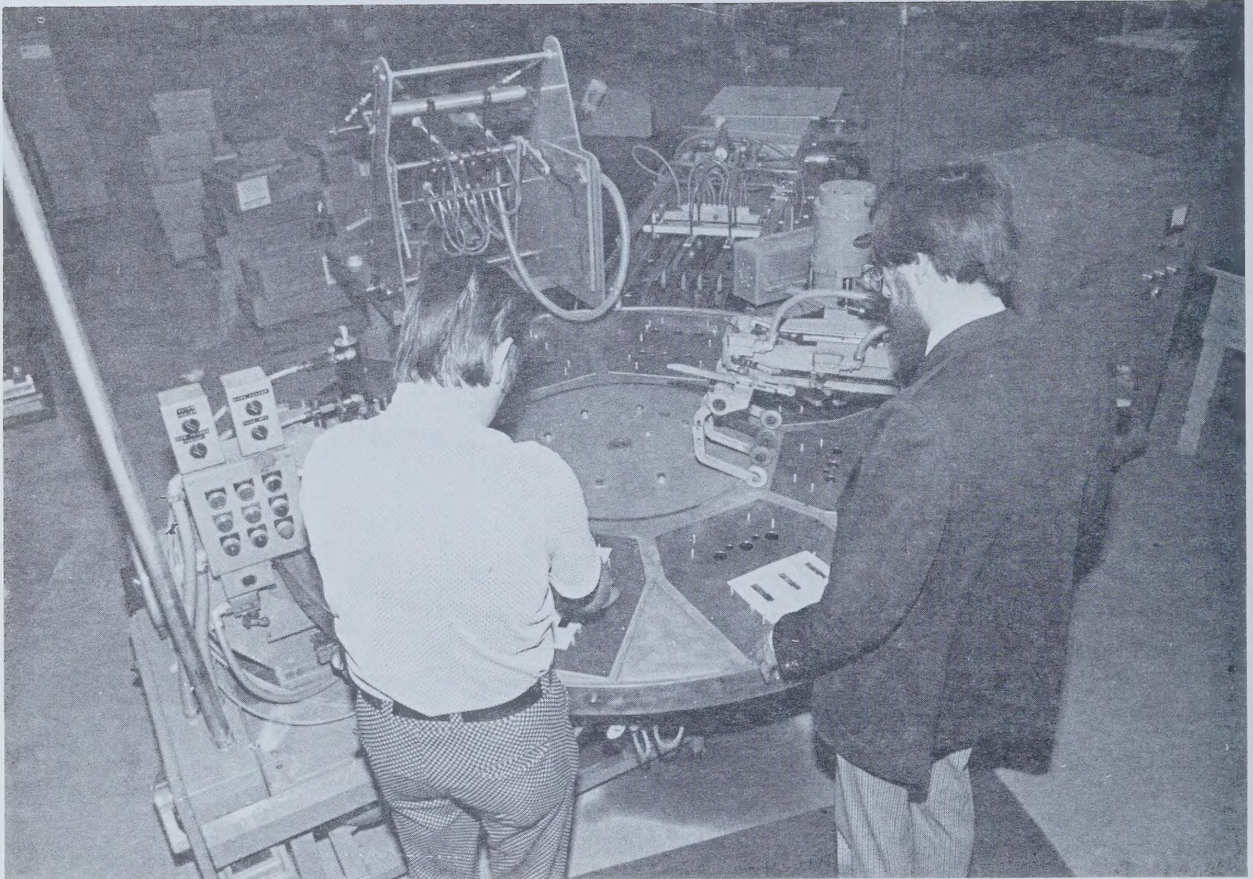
(b) Turntable Type Sealer with Operators in Position
